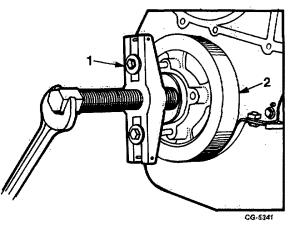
Using SE-1368 Puller to Pull Crankshaft Damper
